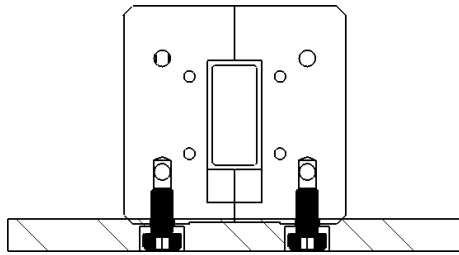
Example of mounting directly on bottom (sectional view with highlighted screws)
